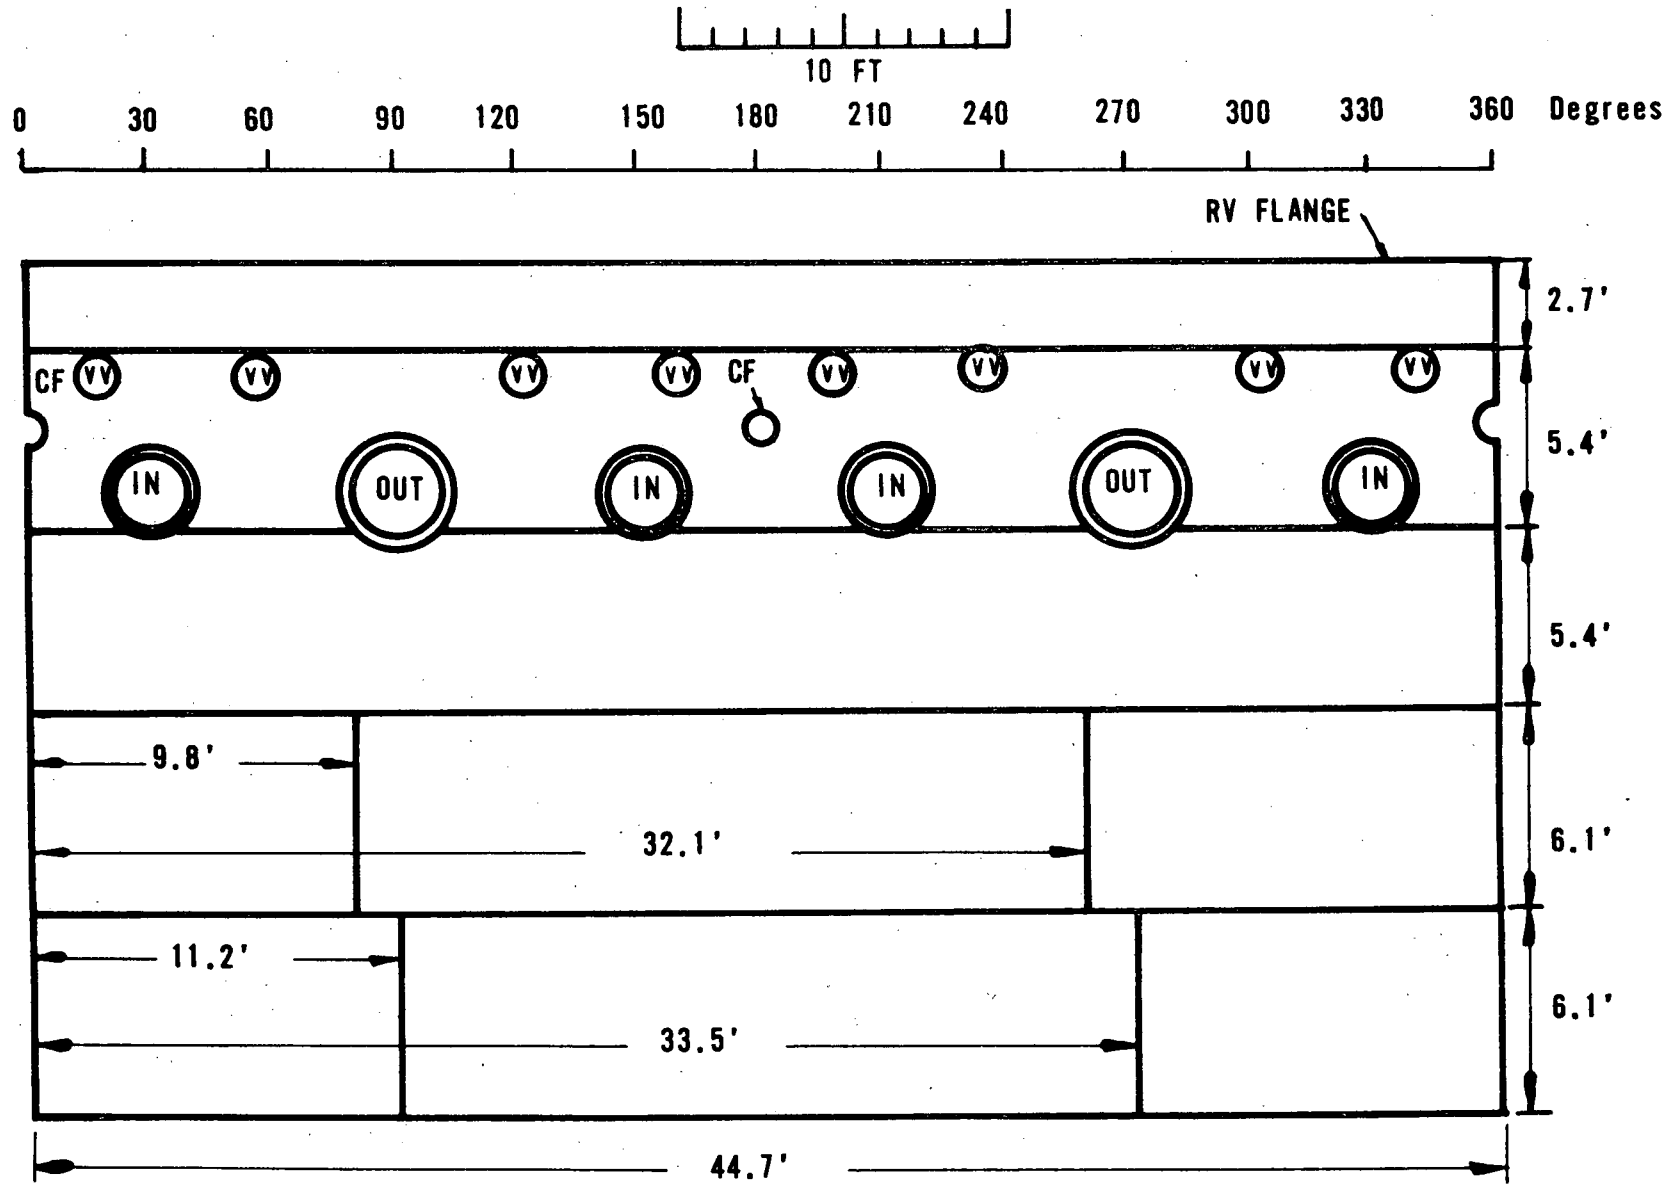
Oconee 1 Inside Surface Reactor Vessel - Weld Locations of Interest
